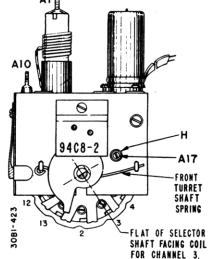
Front View of 94C8-2 Tuner With Sharp Tuning Rotor Outside Chassis.
